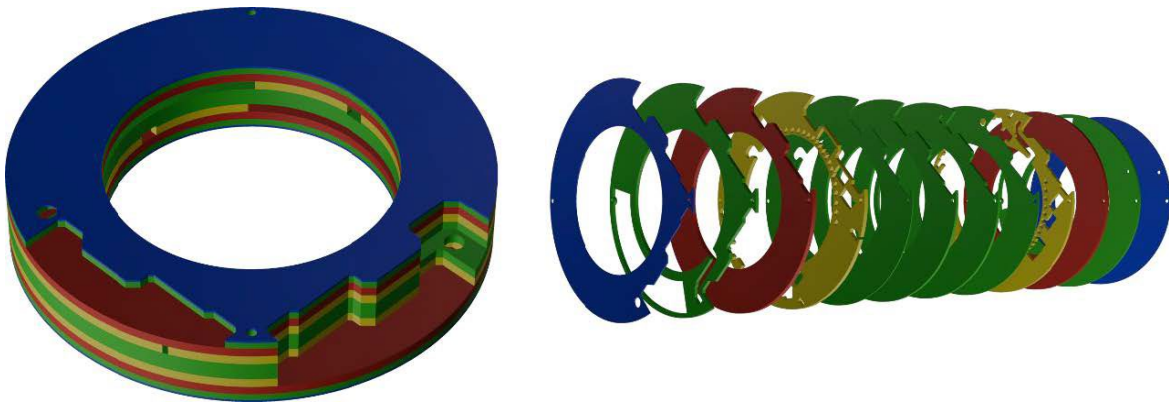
CAD drawing of the revised MWPC design. On the left is shown the assembled view, while the right shows an exploded view of the various PCB
